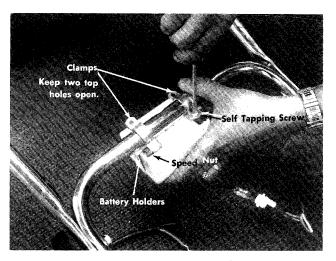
ASSEMBLY OF BATTERY PACK TO HANDLE
